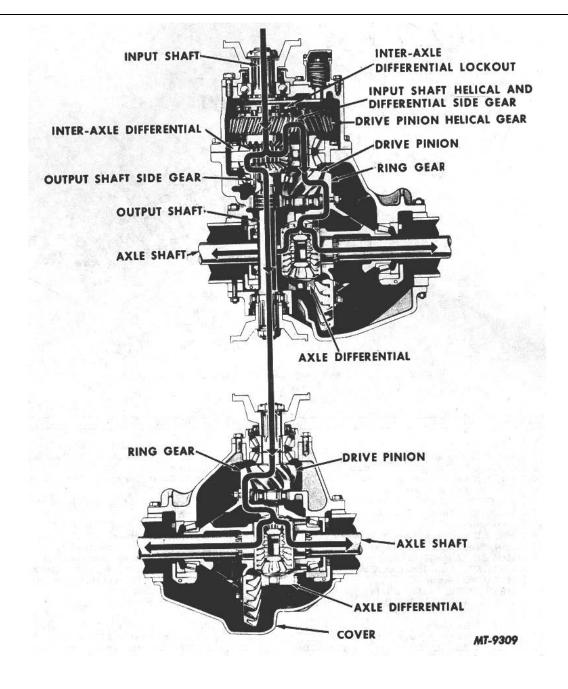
Power Flow through Single Reduction Tandem Drive Axle
